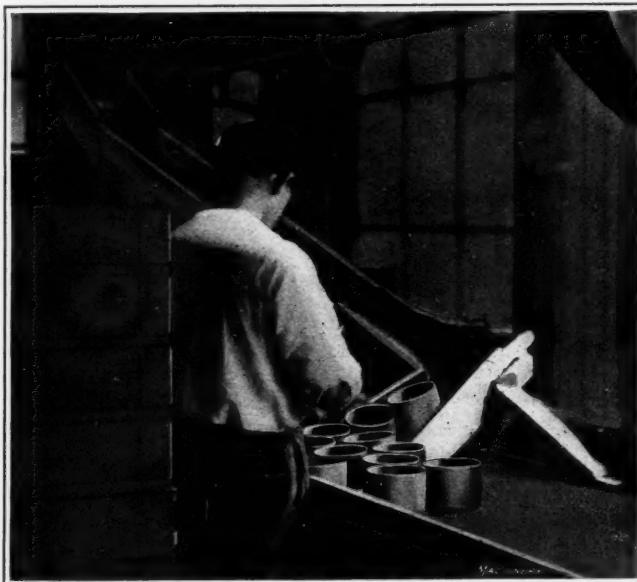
One Type of Conveyor System used which carries Cases from Press to Machining Department—Inspector stands at End of Chute and gages Each Case as it comes through
